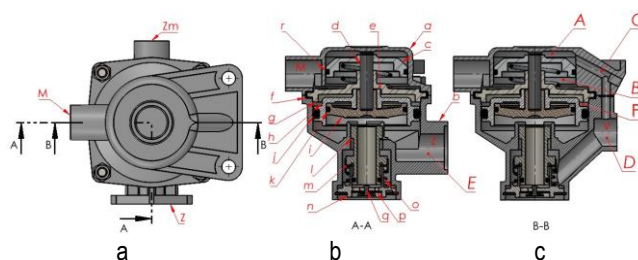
View of the valve: a - top view; b - A-A cross-sectional view of main supply line; c - B-B cross-sectional view of additional supply line
